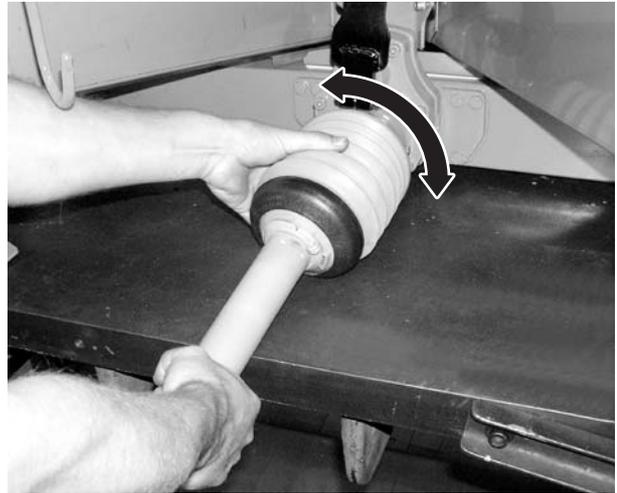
Push the universal drive shaft onto the transmission spigot
